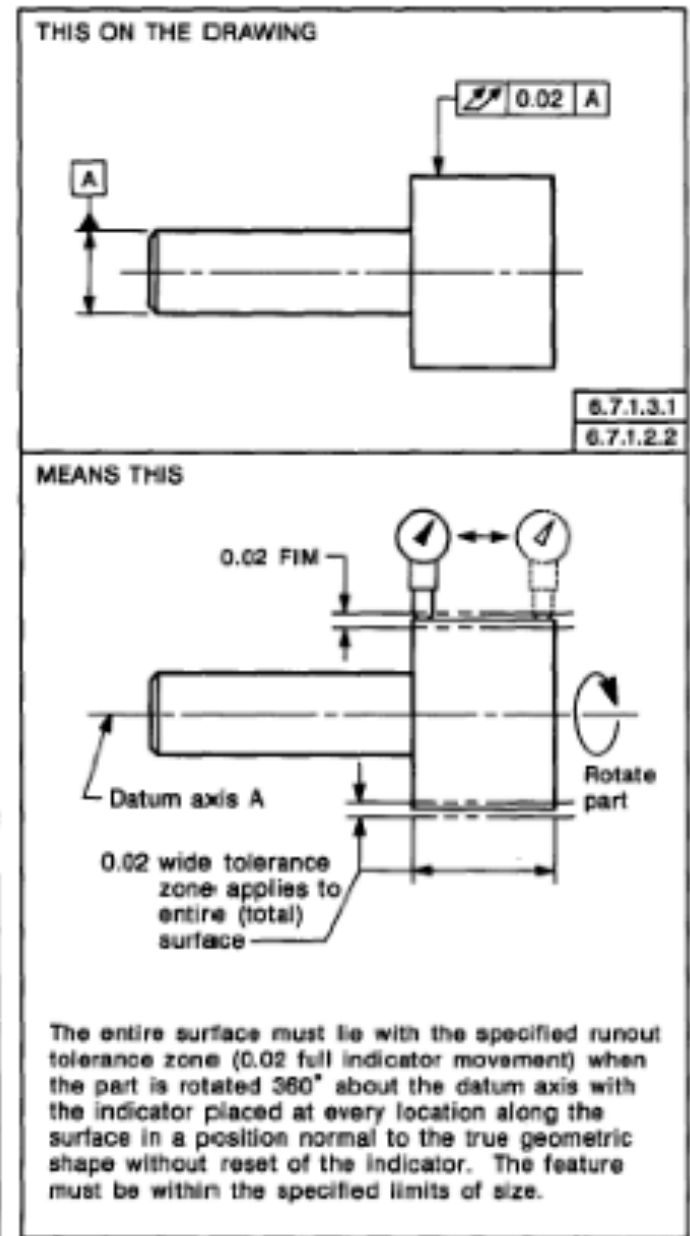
SPECIFYING TOTAL RUNOUT RELATIVE TO A DATUM DIAMETER
